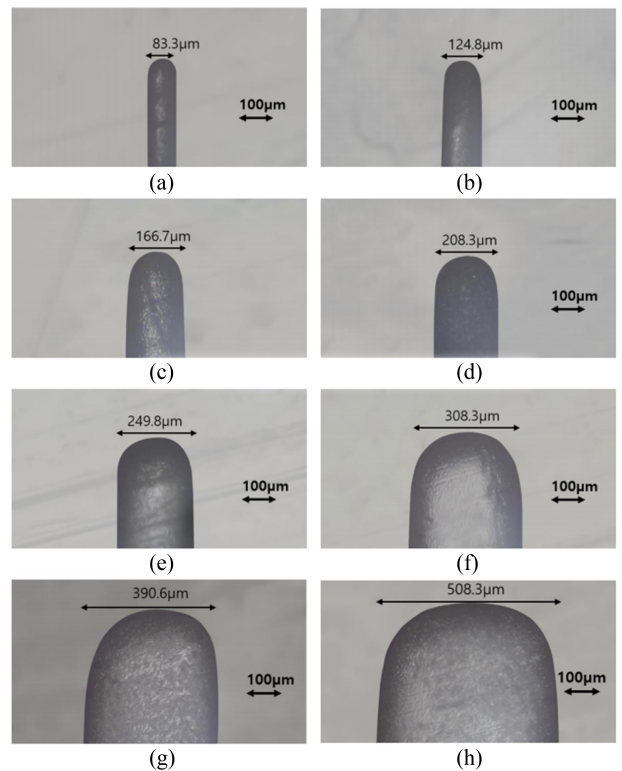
Cross-sectional micrographs of narrow width strips printed using the prototype 3D printer
